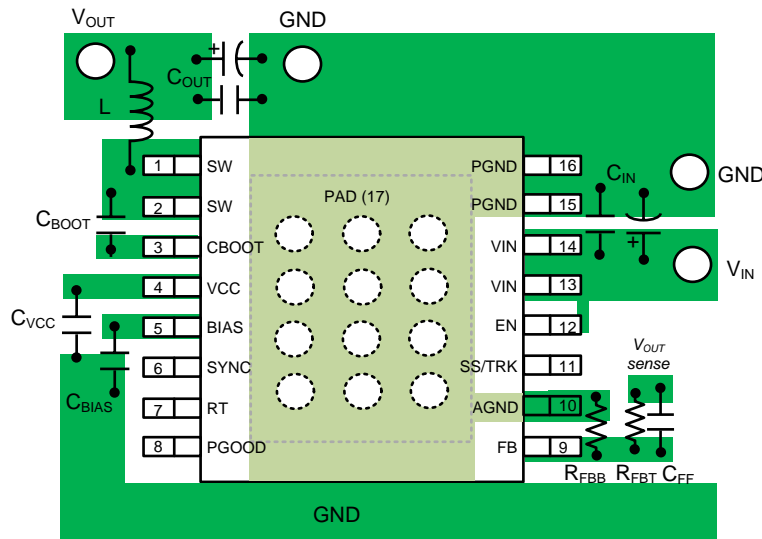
Compact PCB Layout for LM4360x and LM4600x
